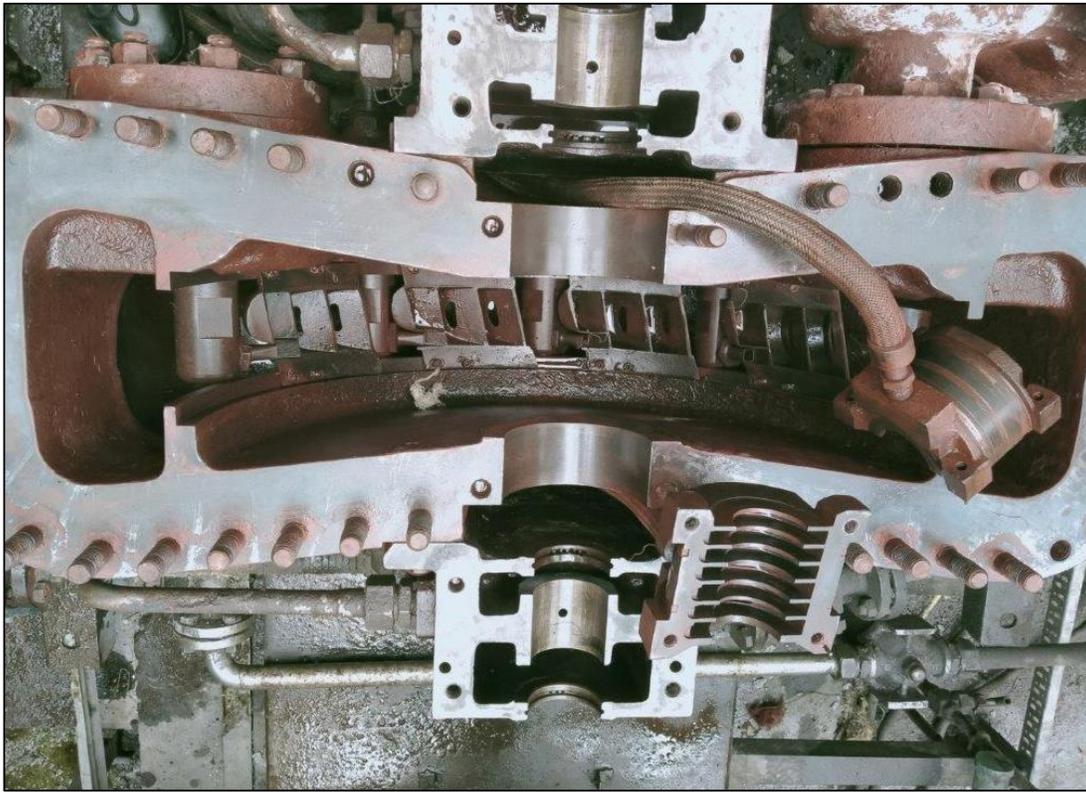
Turbine Internals Thorough Checked, Servicing & Preventive & Thorough Healthiness Checking Done
